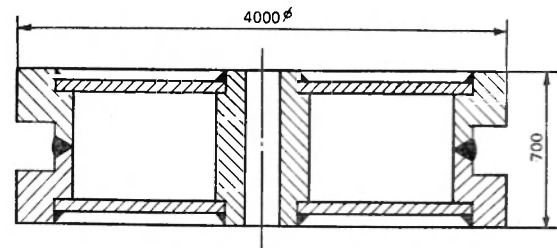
Fabricated Gear Wheel—3800 PCD & 30 Modules.
